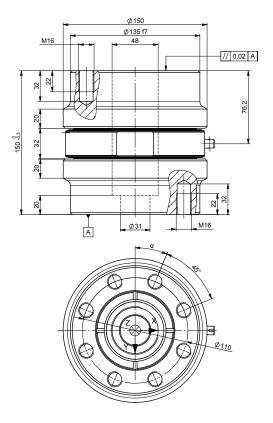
Dimensions of the triaxial load cell Type 9397C1. (Beim 9397C3 ist das Lochbild um 22.5° gedreht.)
